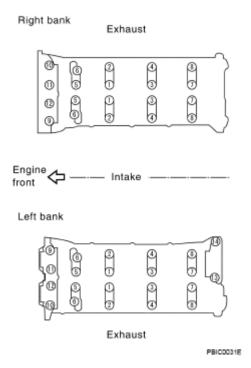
Identifying Camshaft Bracket Bolts Tightening Sequence
